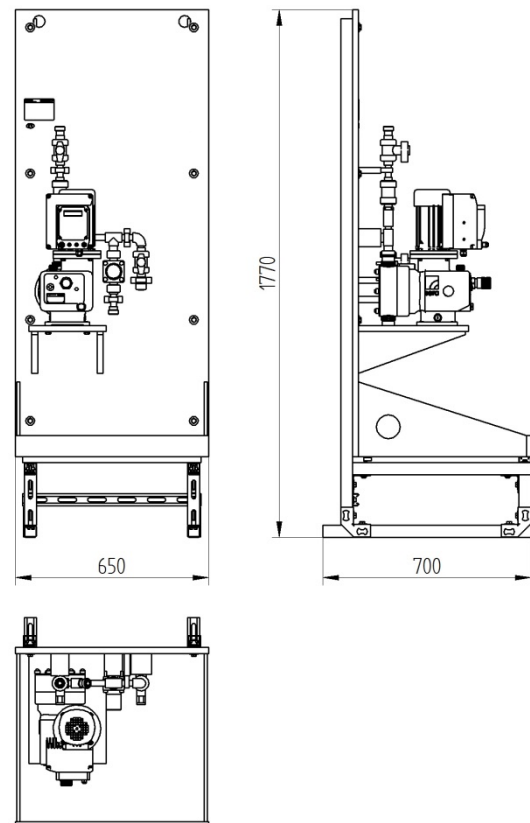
Dimensions of the CVD1 (floor mounting, steel stand)
